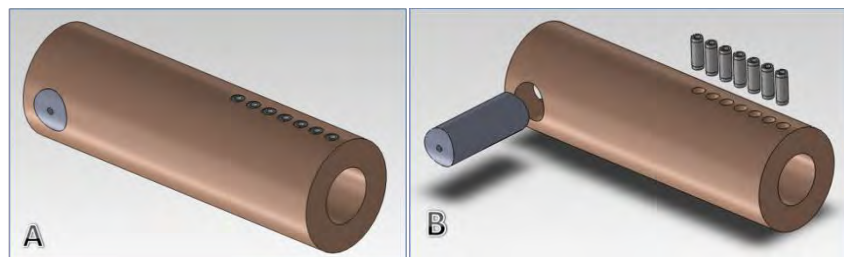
A) Assembled view of bronze sleeve. B) Exploded view of bronze sleeve.
